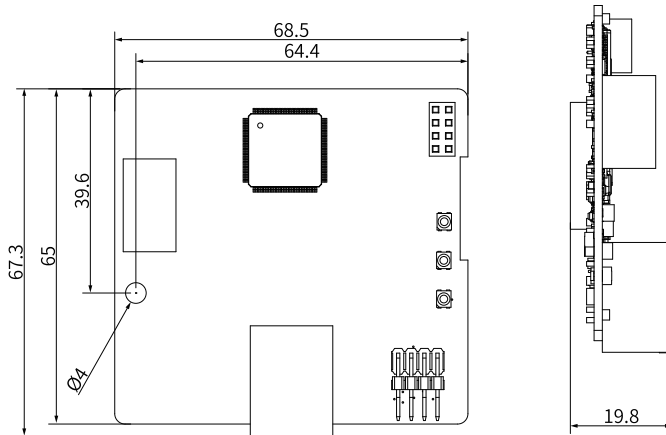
MD580-SI-EM1 card dimensions (unit: mm)
